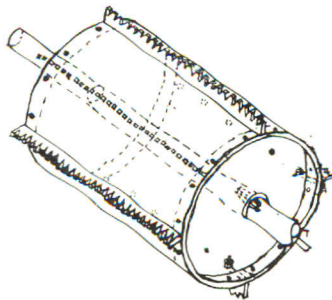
D. Prototype cylindrical grater: the drum. Note the six saw-teeth blades 60° apart.
